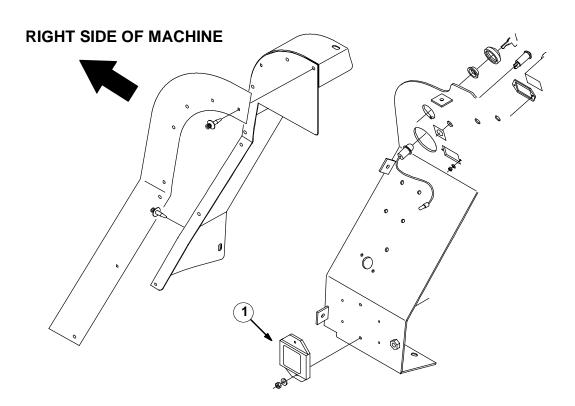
FUEL SOLENOID MODULE INSTALLATION
